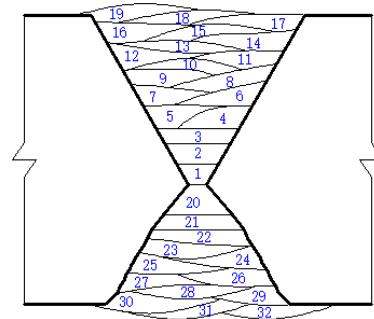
Typical welding process of the 50 mm thick butt welded sections
